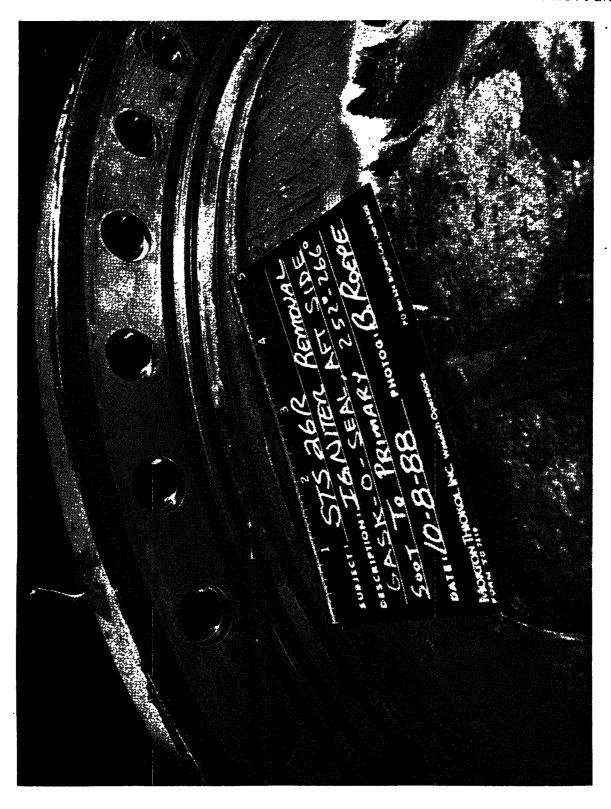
Igniter Gask-O-Seal Soot Right Motor
